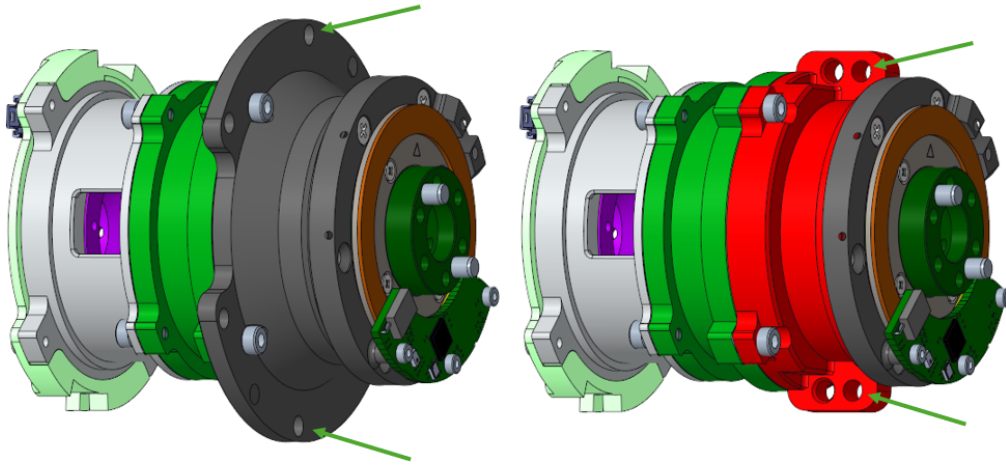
The Alberobotics Lime SEA. On the left, the original design with an overall diameter of 92 mm and axial fasteners, on the right, the customised design (new mounting flange in red) with an overall diameter of 70 mm and tangential fasteners. The green arrows indicate the holes for the fasteners.
